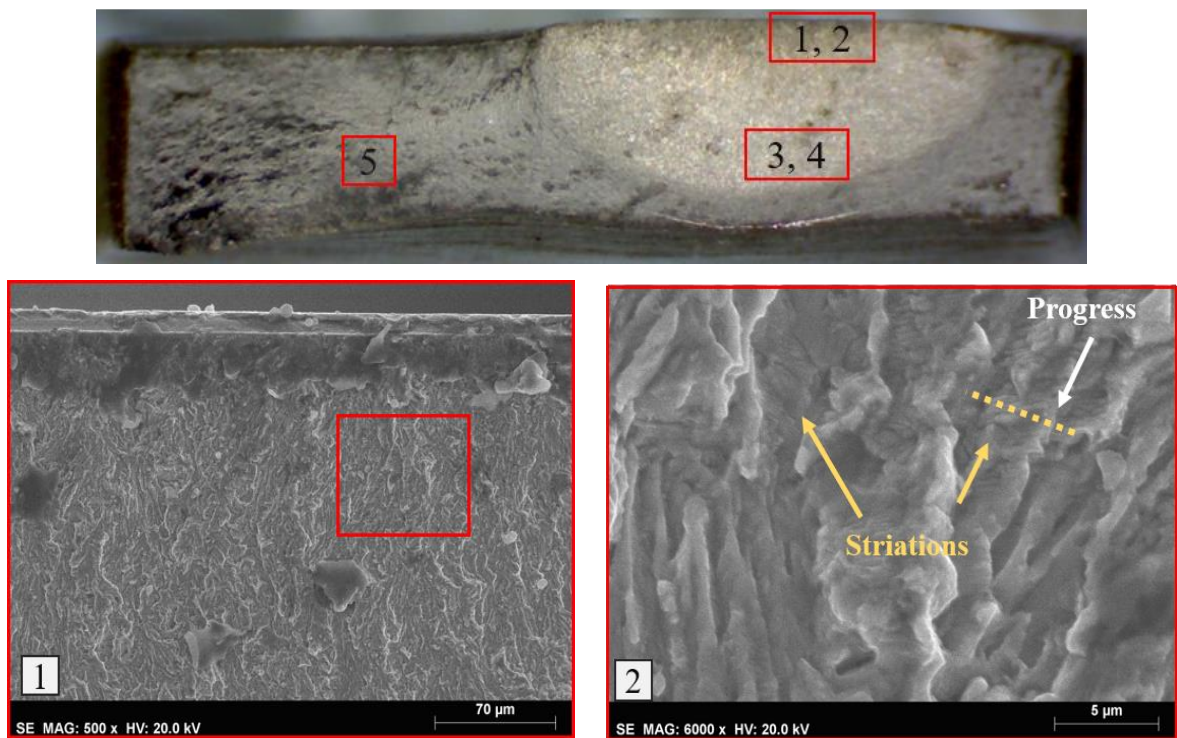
Sequence of fracture surface images of 10Lb specimen: 1. Crack nucleation, 2. Fatigue Striations, 3. Fracture propagation and 4 and 5. Ductile fracture (dimples and inclusions).
